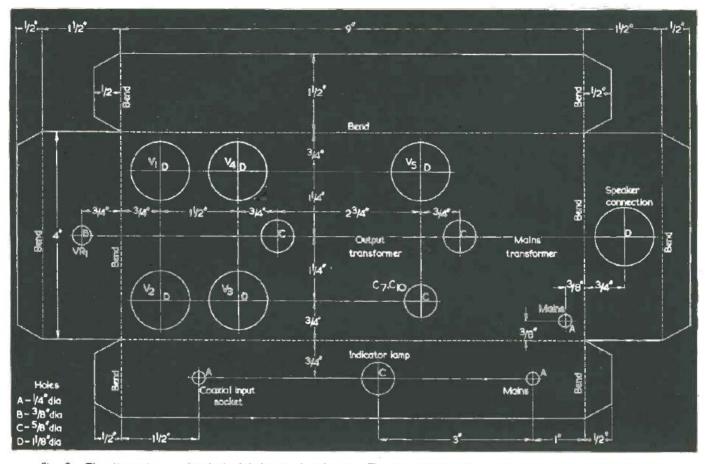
The dimensions and principal holes in the chassis. The sin hole for C₇₋₁₀ may need to be larger for some components. Before drilling mounting holes for the valveholders, check against Fig. 3 for orientation
